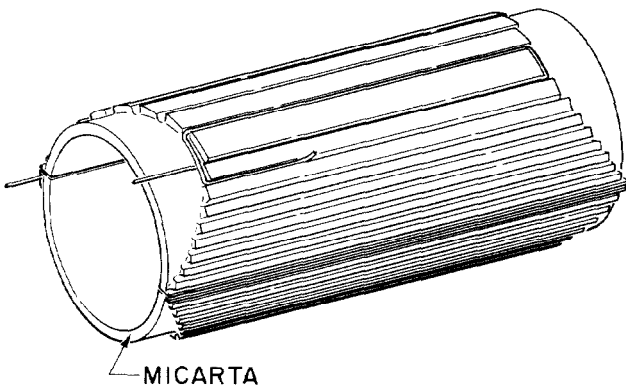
Cross section of a cosine-type steering coil. Length can be varied to suit conditions.
